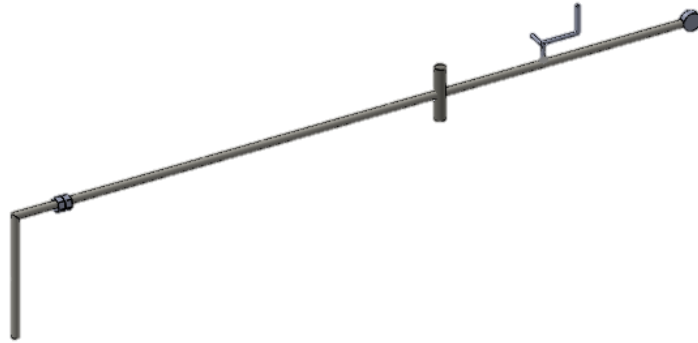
5 Pressure Gauge Tube (Part No. 005).
